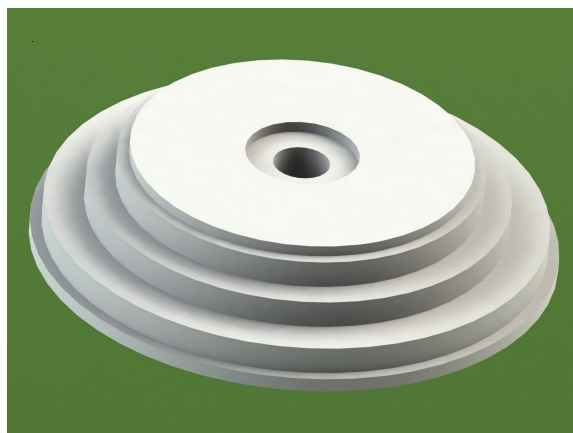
The base piece used in the manufacturing process of the ICAM
